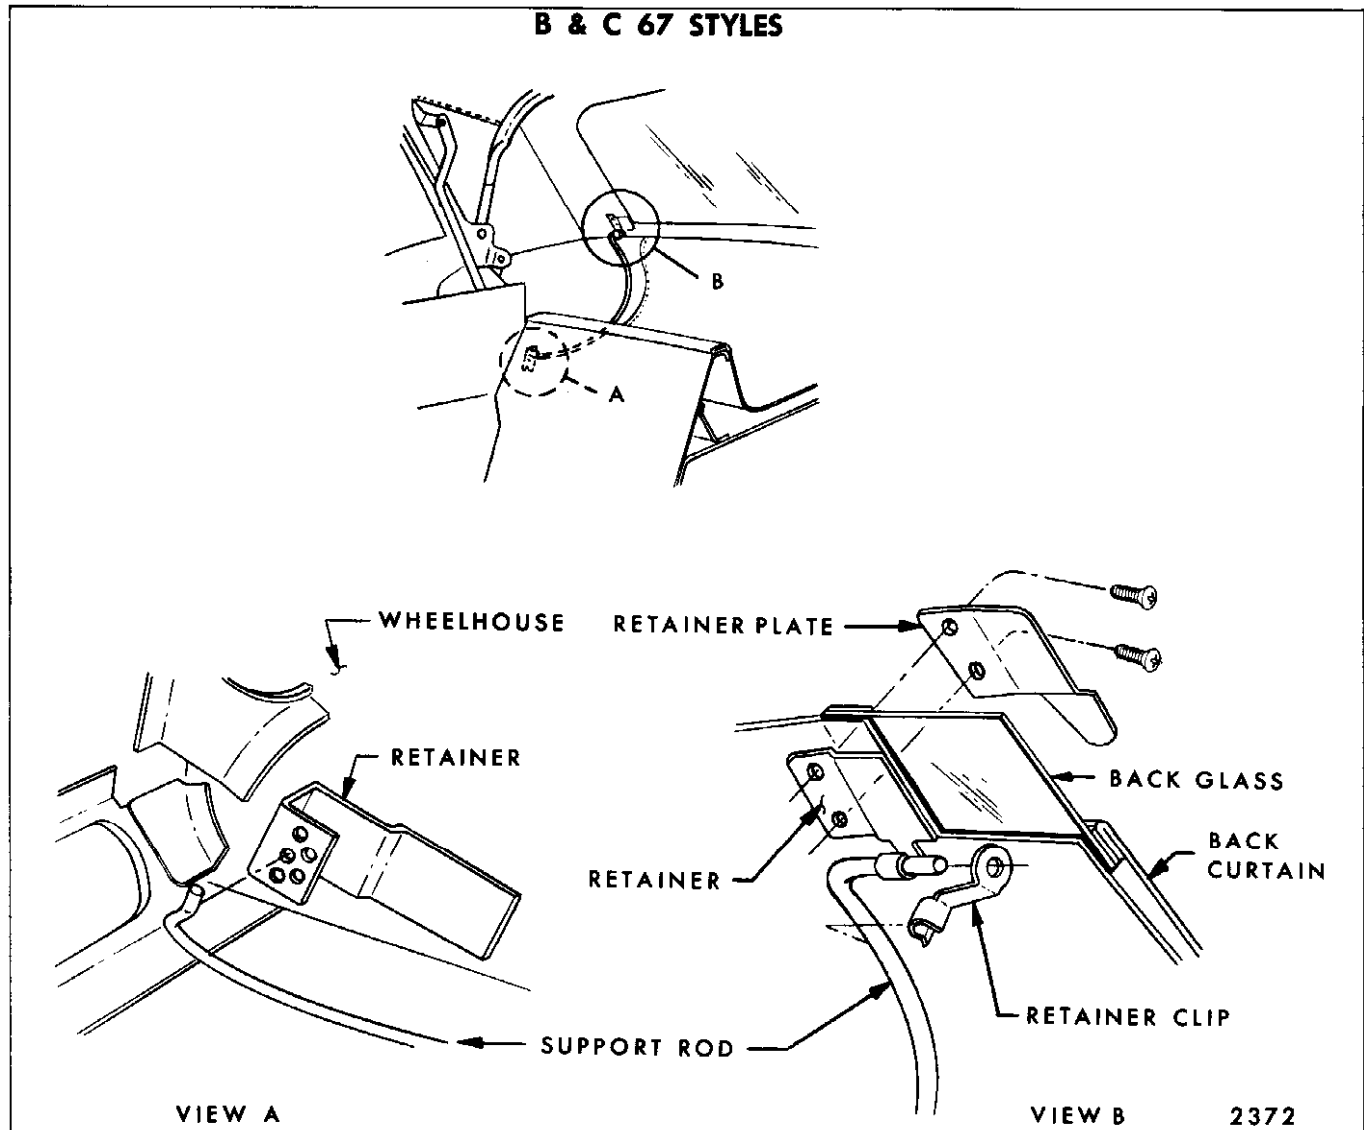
"B & C" Body Back Glass Support Rod Attachments
